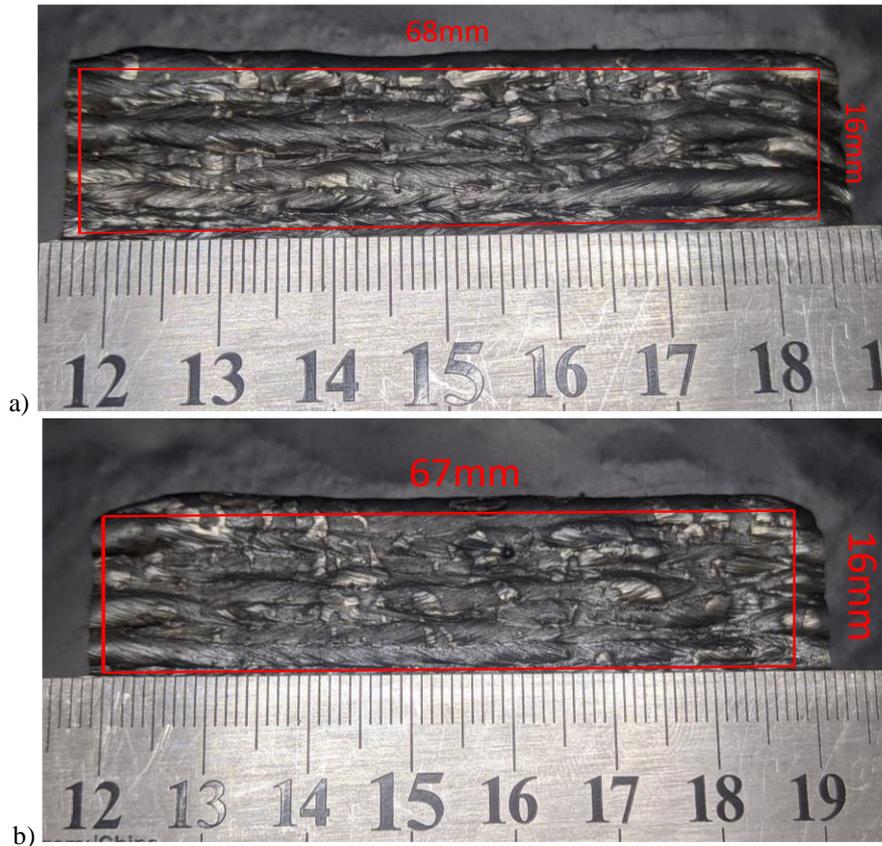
Frontal section area of the preform a) with natural cooling and b) with forced air cooling.
